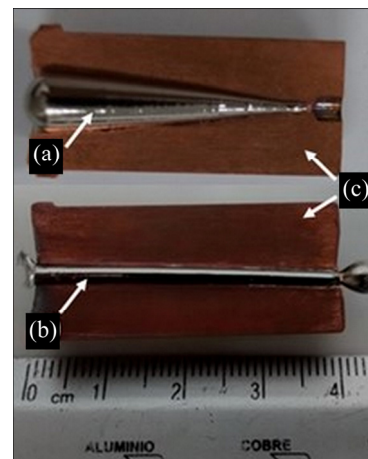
Conical and cylindrical ingots obtained from suction casting: (a) Conical sample; (b) Cylindrical sample; (c) Cu mould
